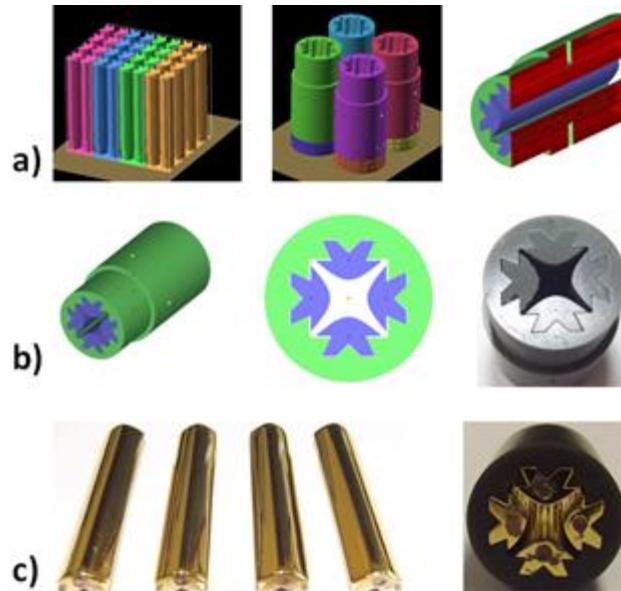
Design, fabrication and assembly of DLP linear ion trap: a) fabrication design stack of DLP LIT rods and housings on a machine build envelope with vertical cross section of LIT assembly, b) fabrication design of LIT assembly with non-coated prototype, c) electroplated LIT rods and final rod assembly in ceramic resin housing.
